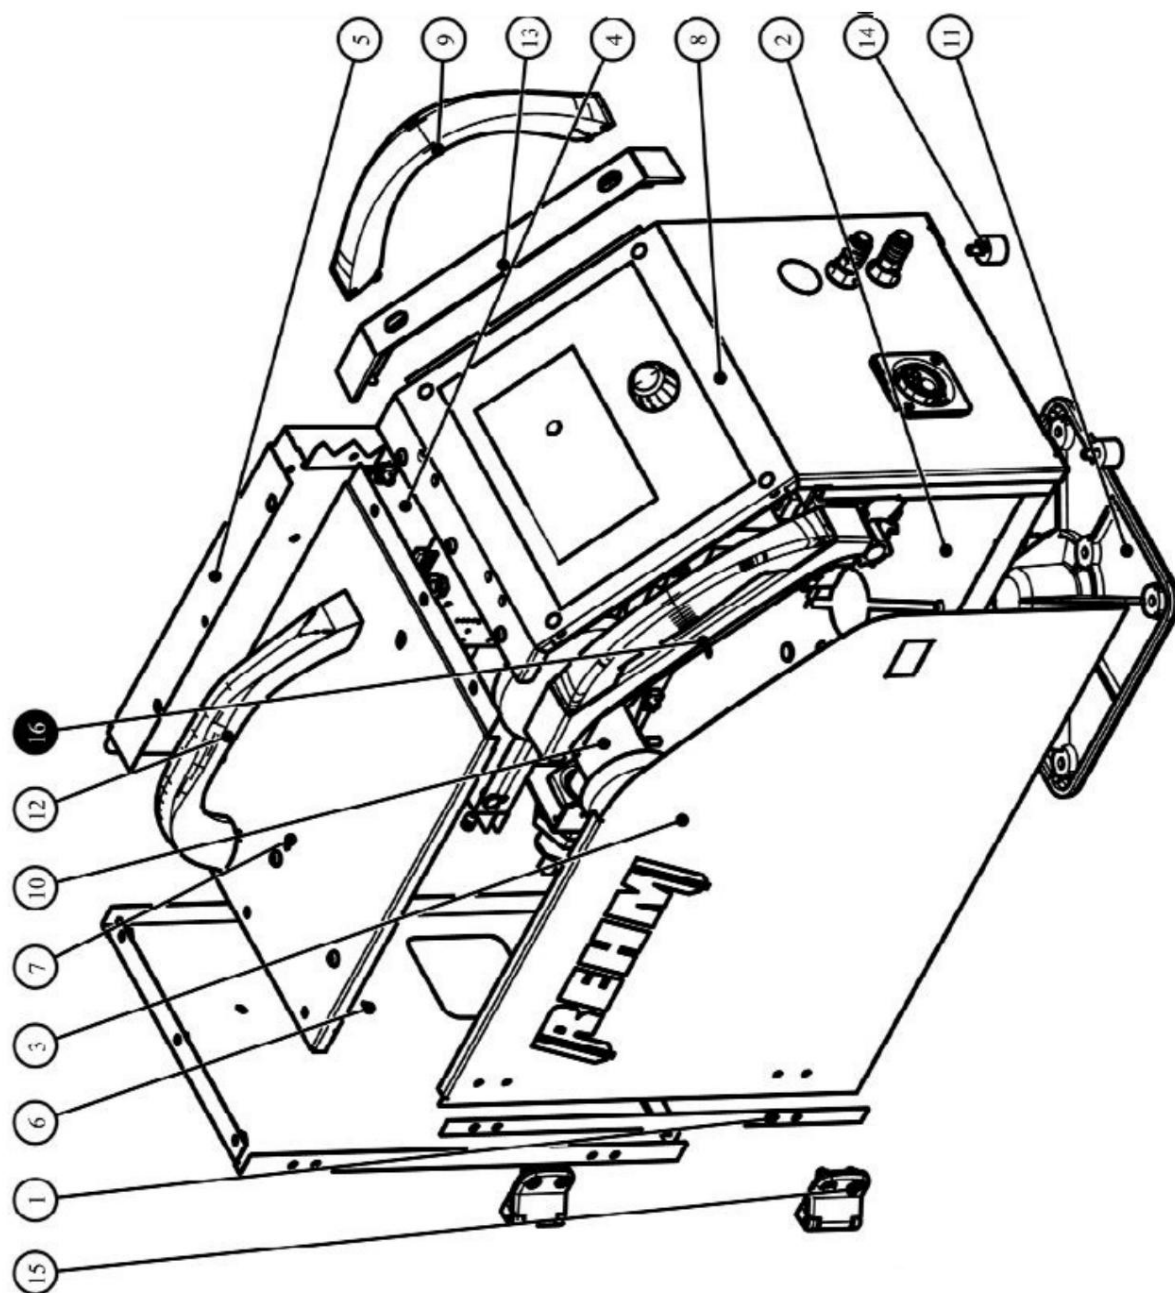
Spare parts drawing 4 - Feed case PRO-MIG ARC 404 WS
